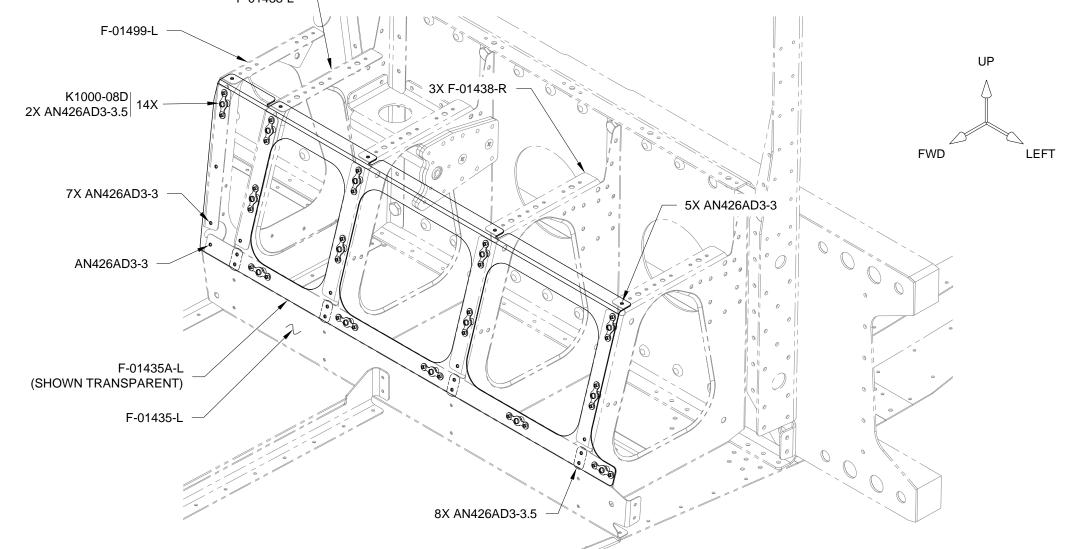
INSTALL COVER PANEL (LEFT SIDE SHOWN)
